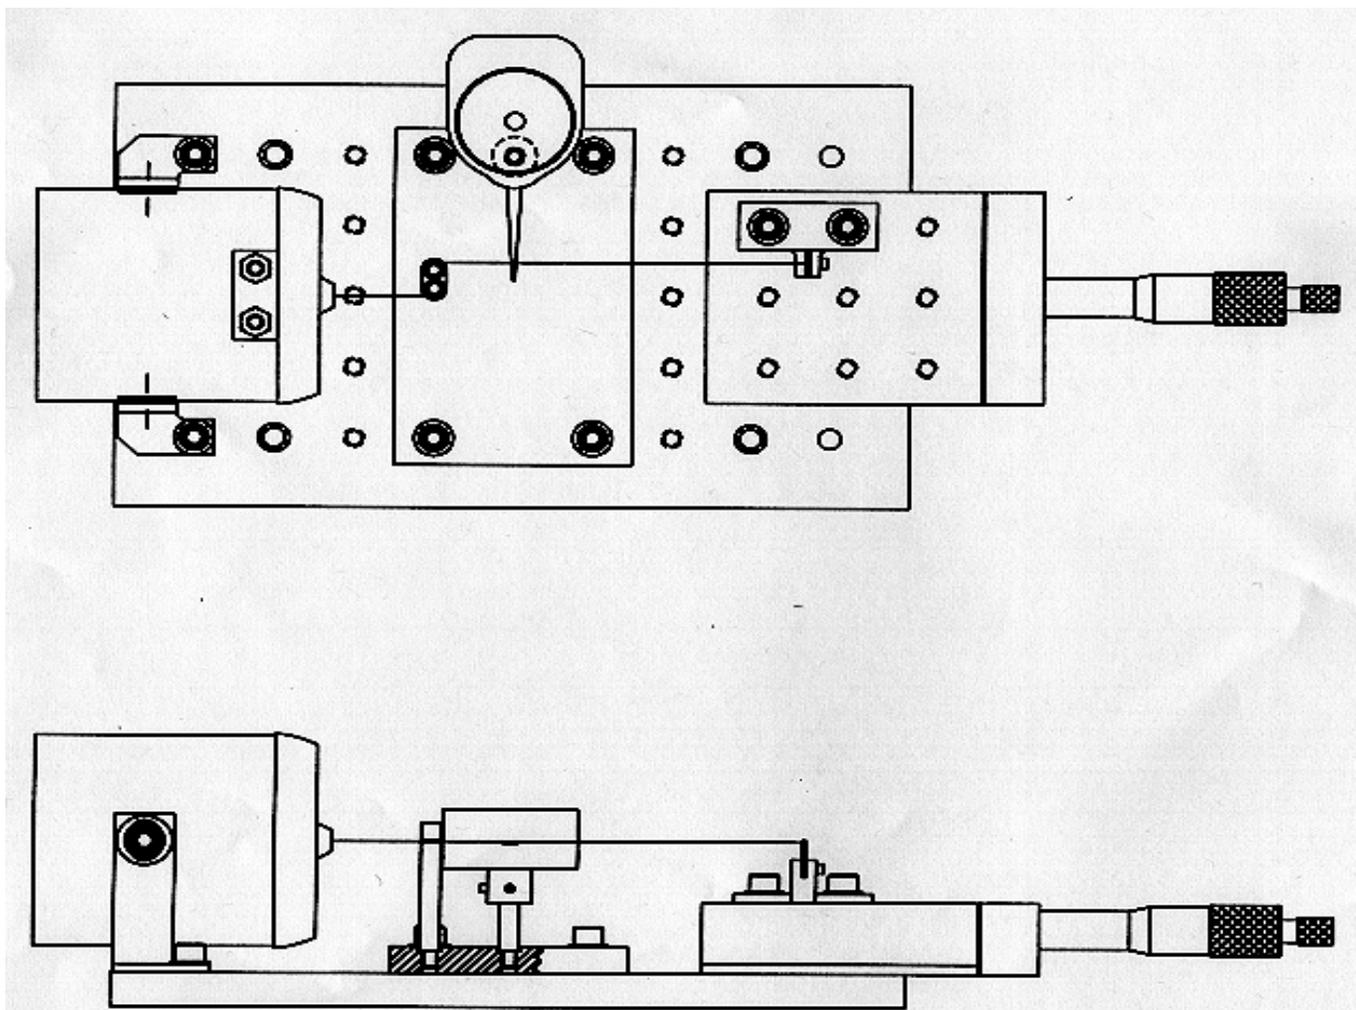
Fatigue Fixture Incorporating the use of Mandrels.
